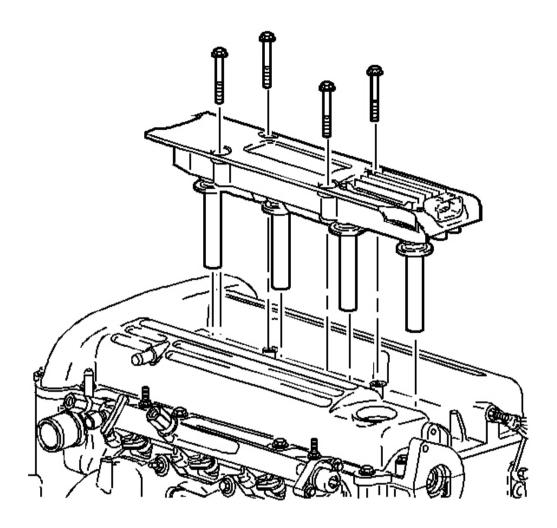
View Of Ignition Coil & Module Assembly Courtesy of GENERAL MOTORS CORP.
